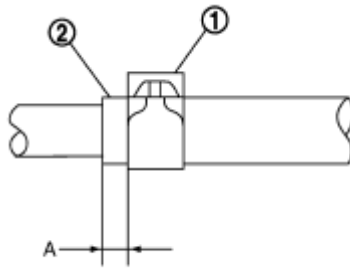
Inserting A/T Fluid Cooler Hoses According To Dimension L
